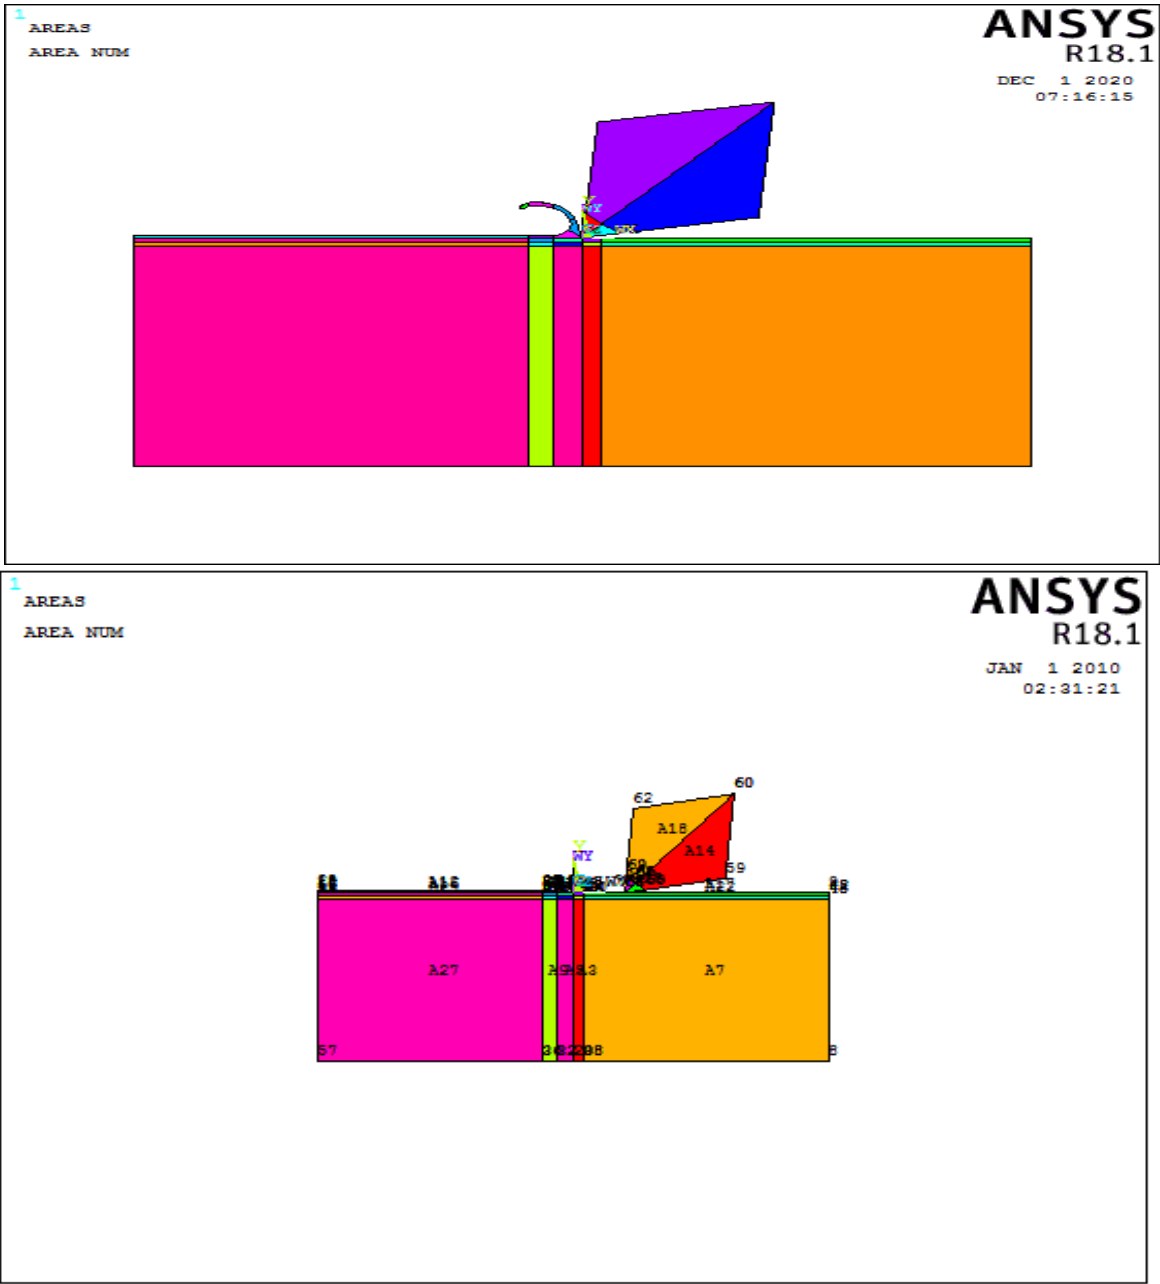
Geometrical modeling of cutting tool and the work piece geometry
